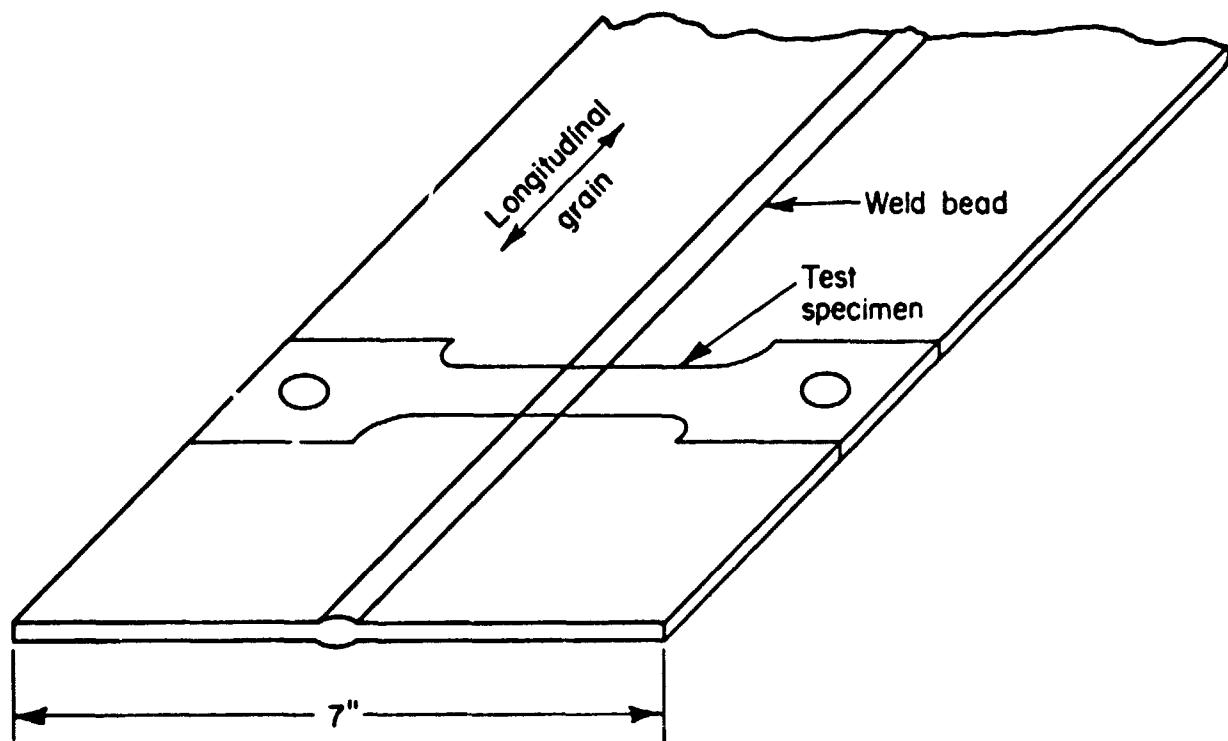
INCOLOY 903 SHEET WELDMENT
